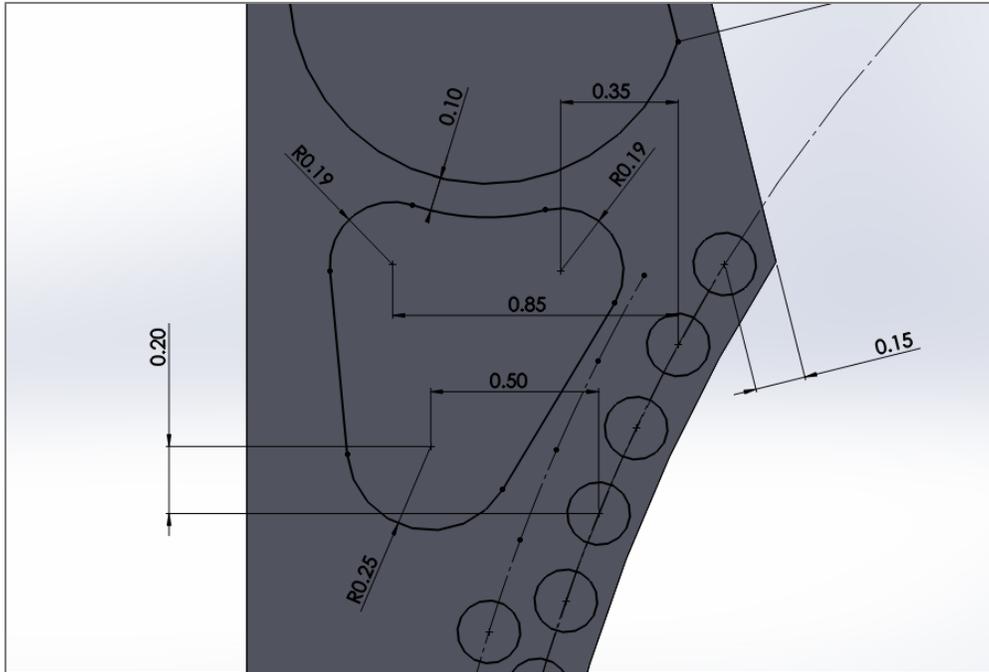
Dimensions used to create the brake on SolidWorks continued.
